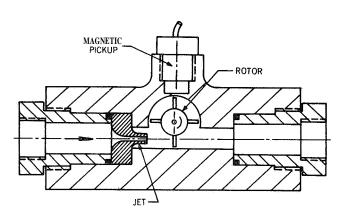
Crossection of a Typical Impeller Wheel Flowmeter
